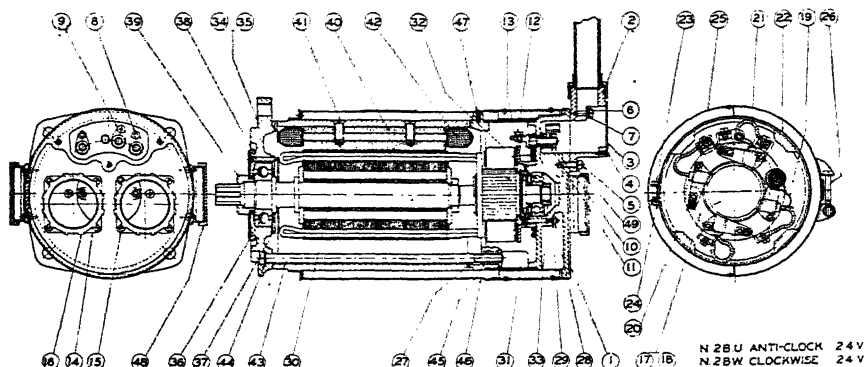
DIAGRAM SHOWING ASSEMBLY OF 1,000-WATT GENERATOR
